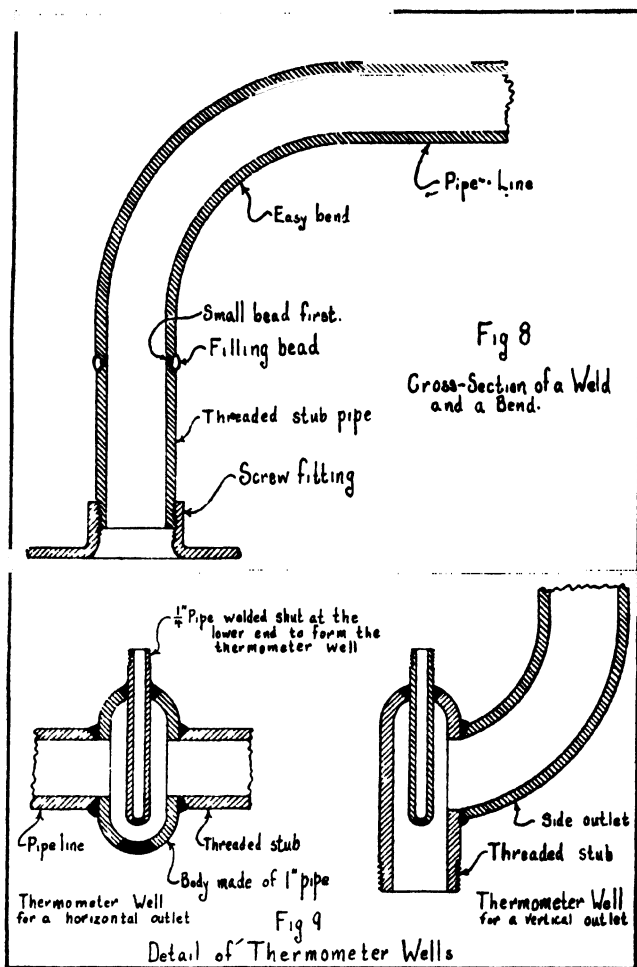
(above). Cross section of welded end bend; Fig. 9. (below). Detail of thermometer wells.
